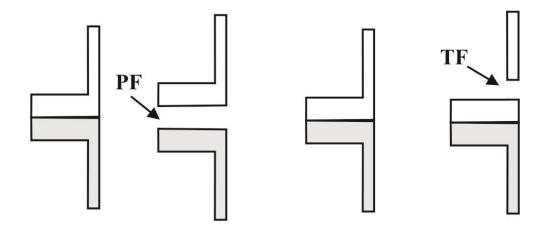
Simplified schemes of heat sealing failures: a) PF - peeling failure; b) TF - tearing failure
